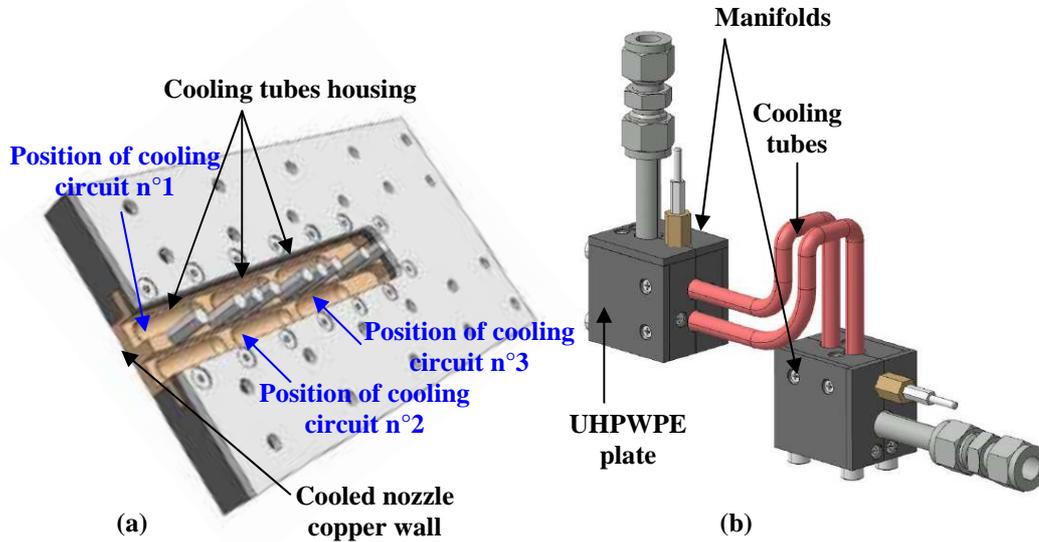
Cooling plate view from below (a) – Cooling circuit assembly including manifolds (b)
